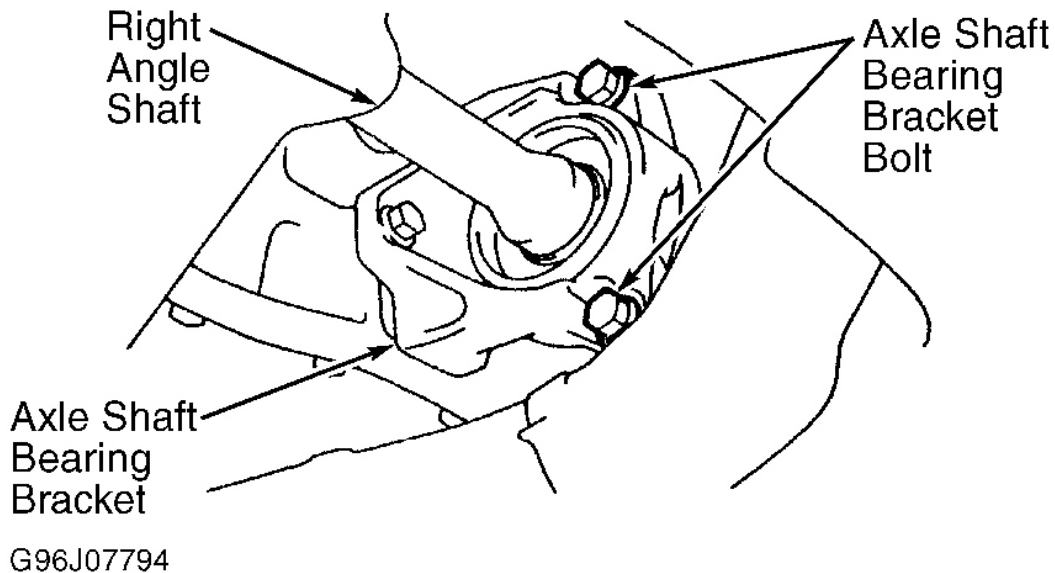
Removing Right (Passenger-Side) Axle Shaft (2WD A/T Models)
